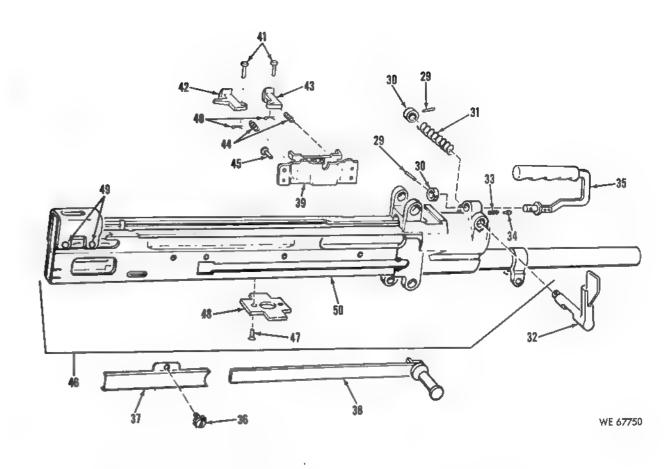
7.62 Millimeter Machine Gun M60D—Partially Exploded View (Sheet 2. 2).
